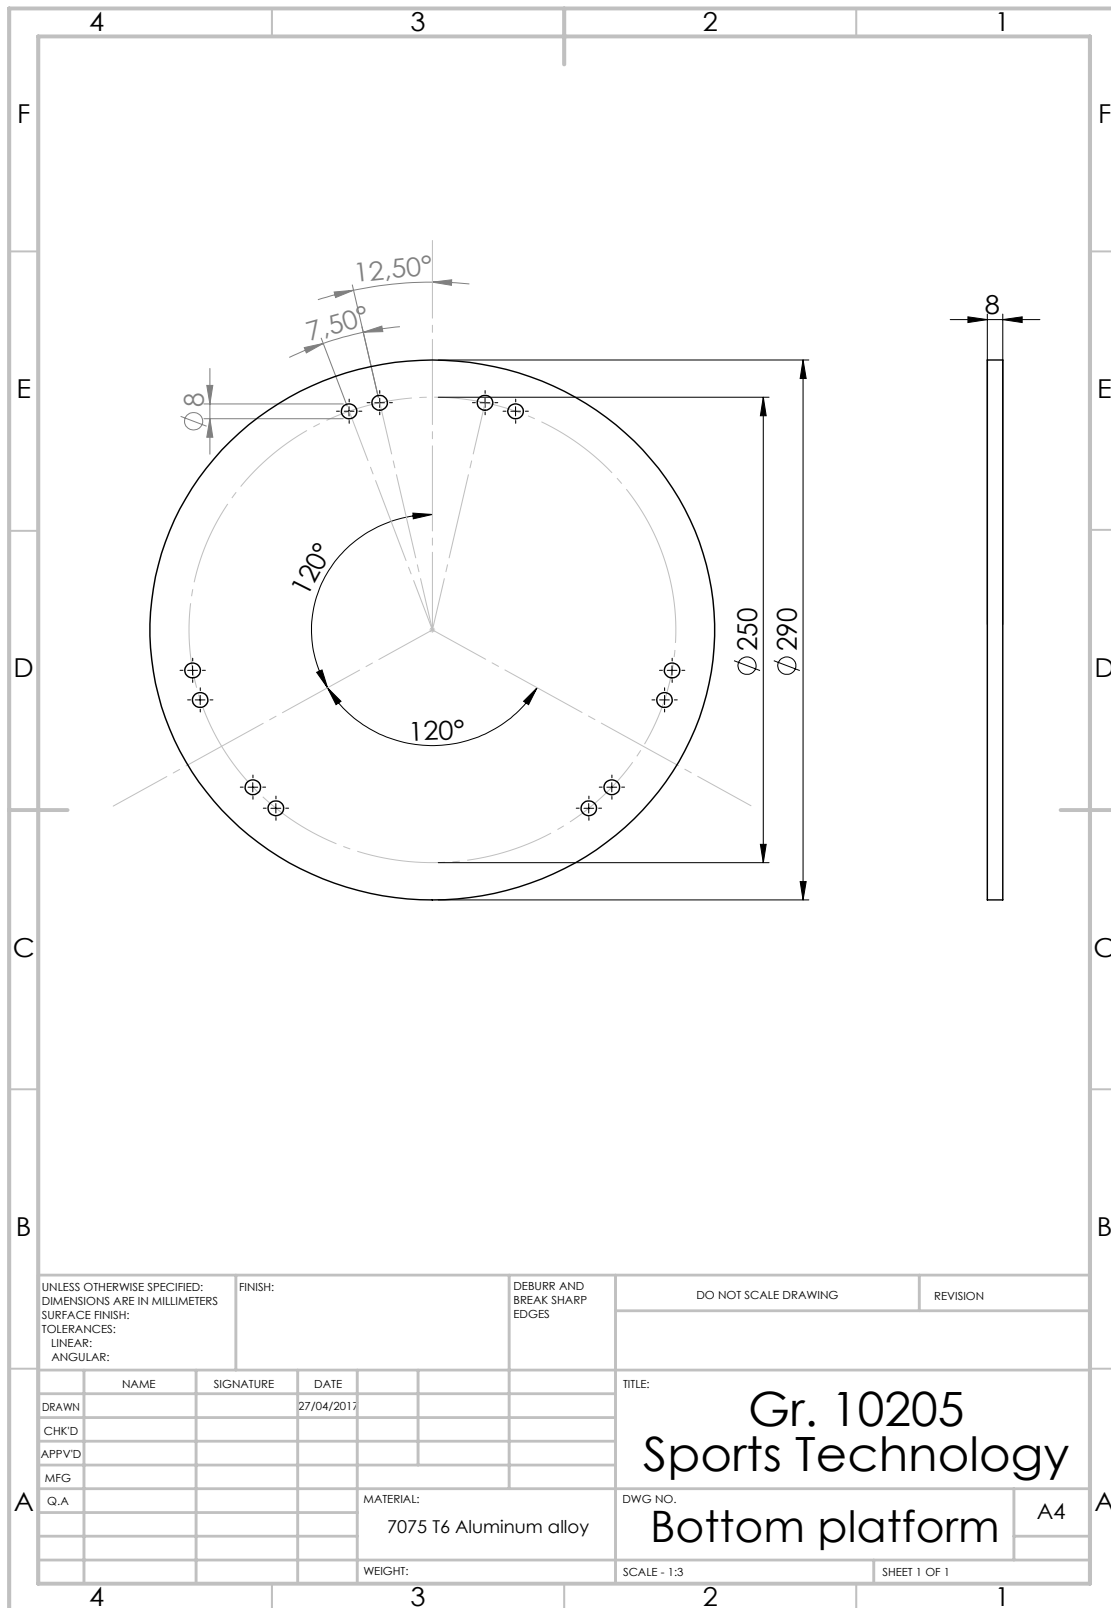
The technical drawing of the bottom platform. The dimensions given are in mm and degrees.
